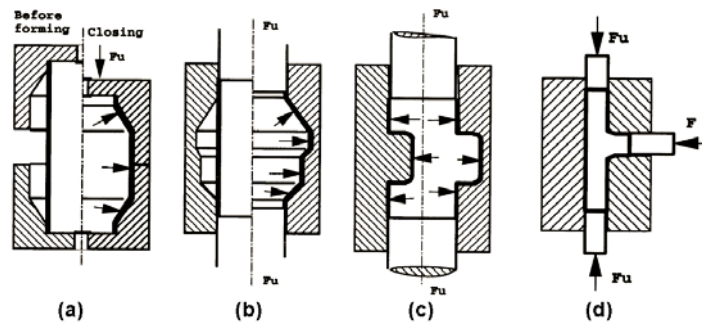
Primary cases of straight tube hydroforming [4]: (a) axially symmetric die with transverse joint face; (b) axially symmetric die with longitudinal joint face; (c) concentric die with counterdraft elements; (d) hydroforming of tube branch elements
